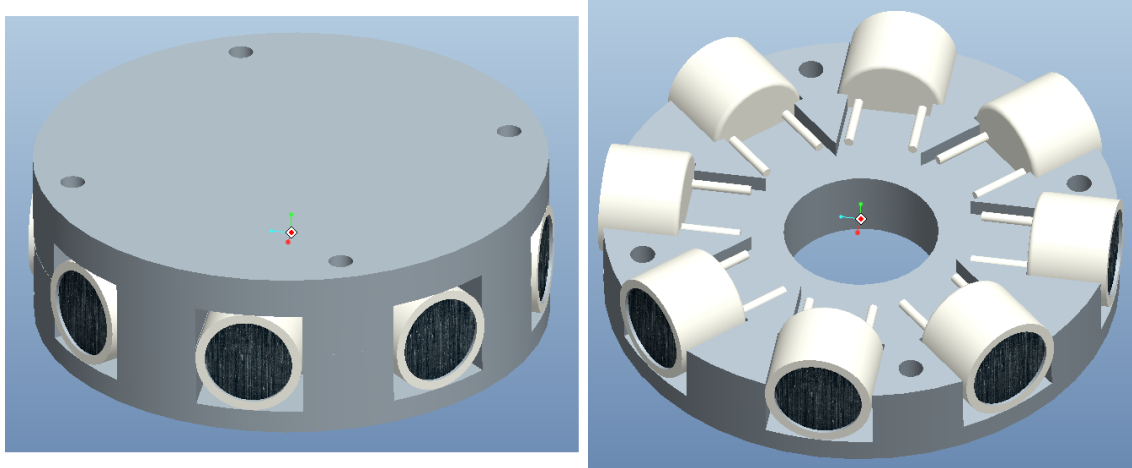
CAD Model of an Ultrasonic Transducer Housing
